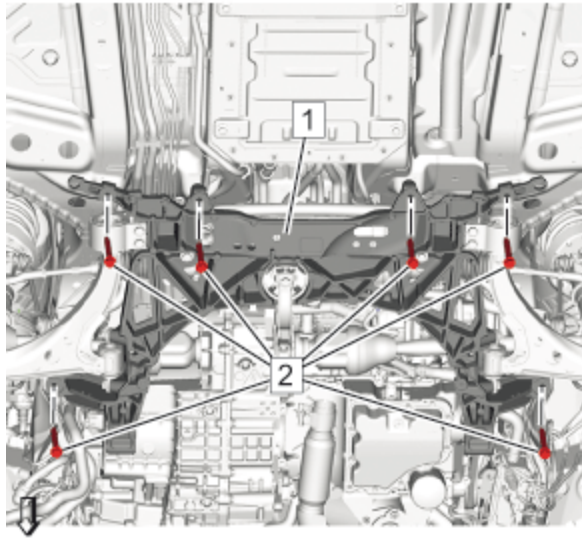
Drivetrain And Front Suspension Cradle Bolts
